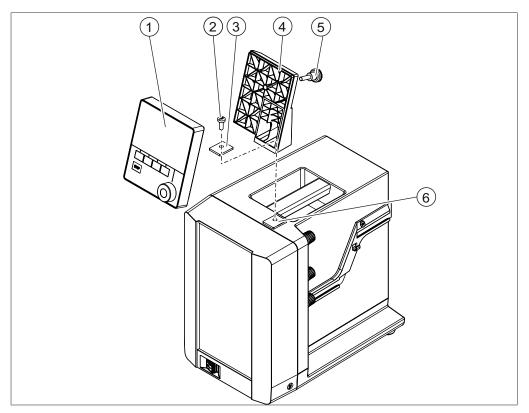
Fitting interface unit on Vacuum Pump V-300
